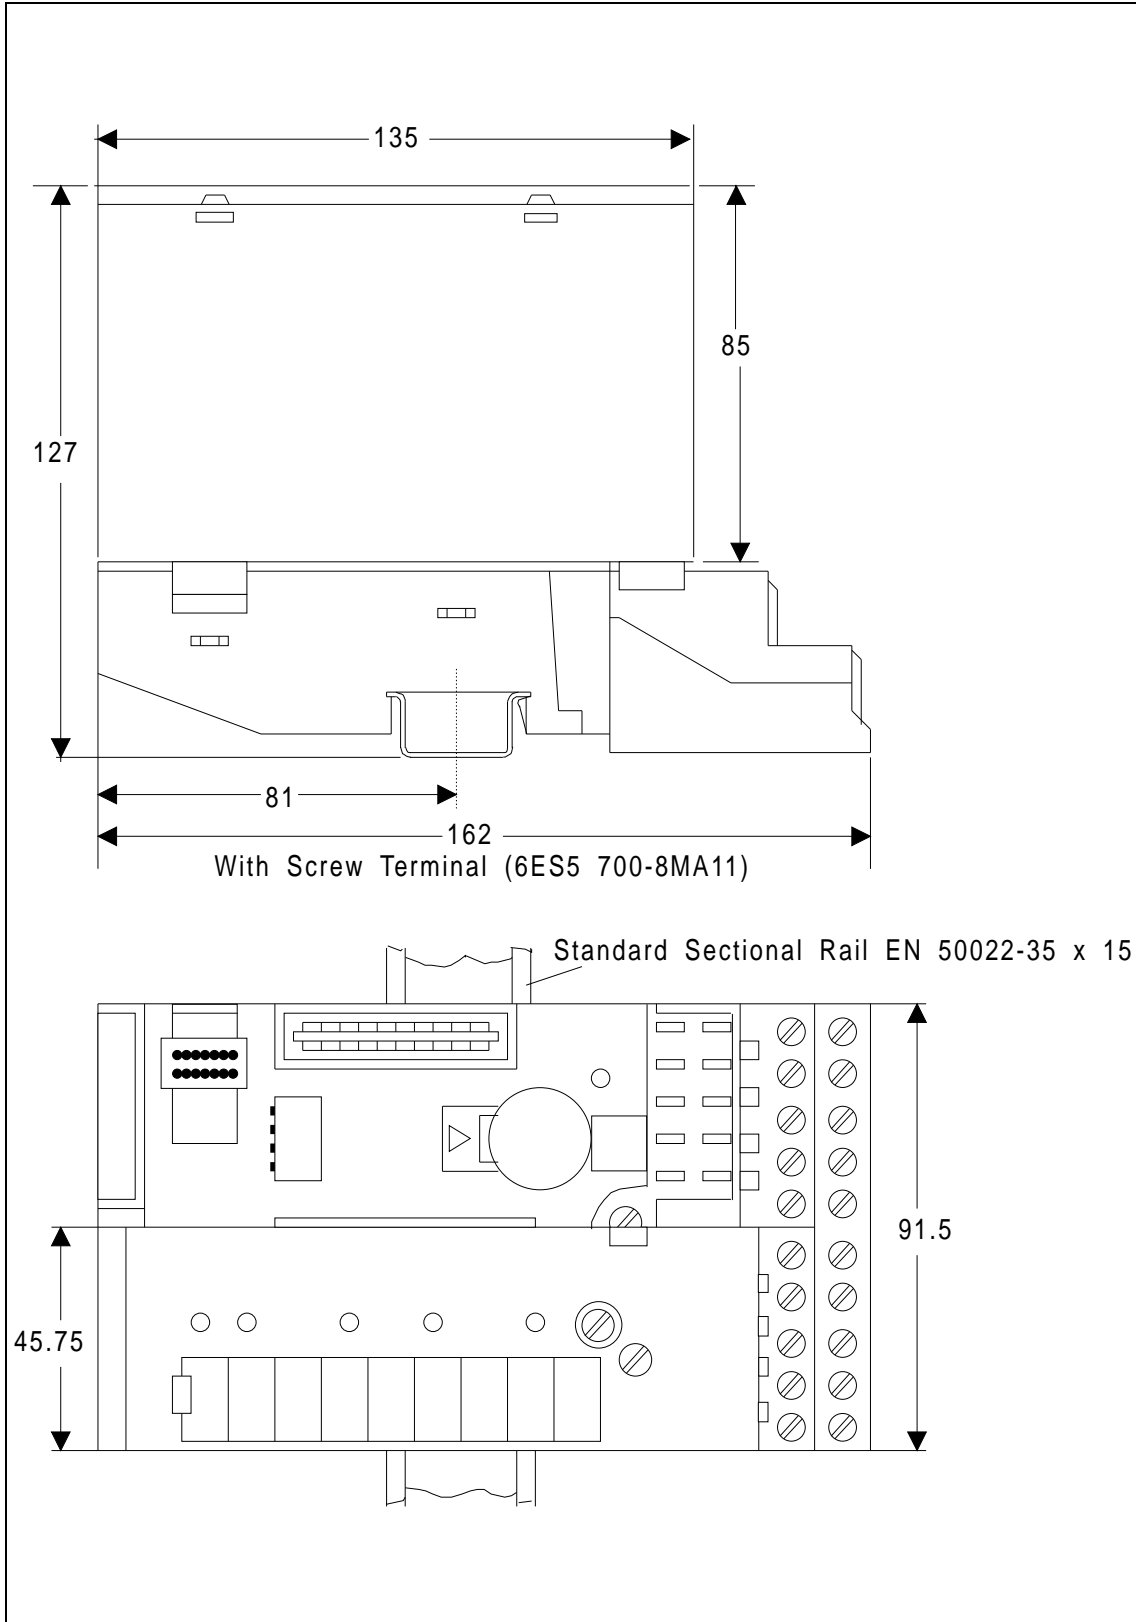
Dimension Drawing of the Bus Unit (SIGUT) with Ex I/O Module
